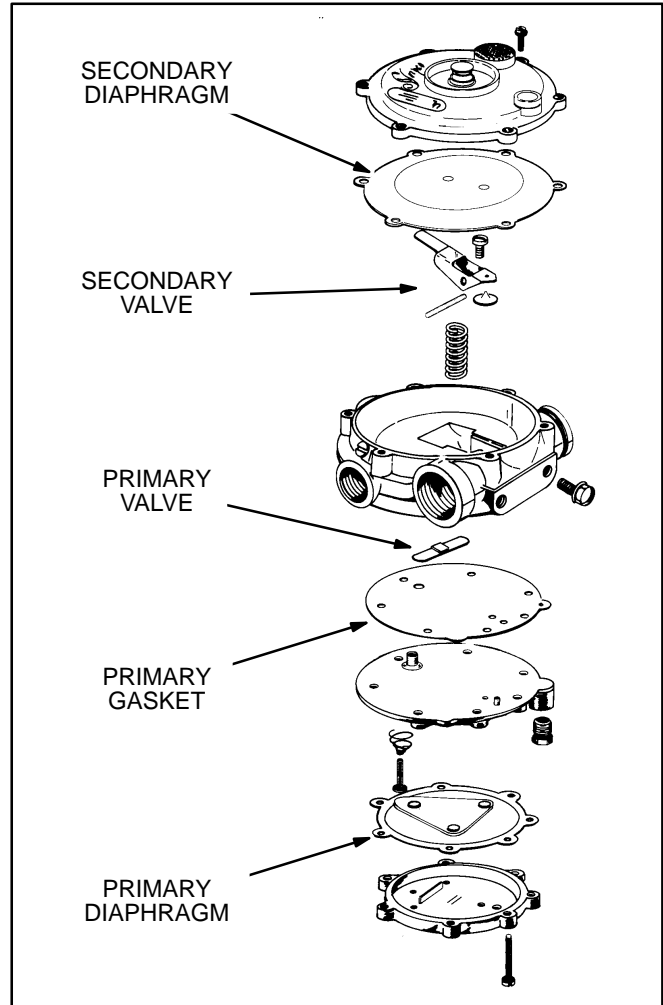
DEMAND REGULATOR ASSEMBLY
